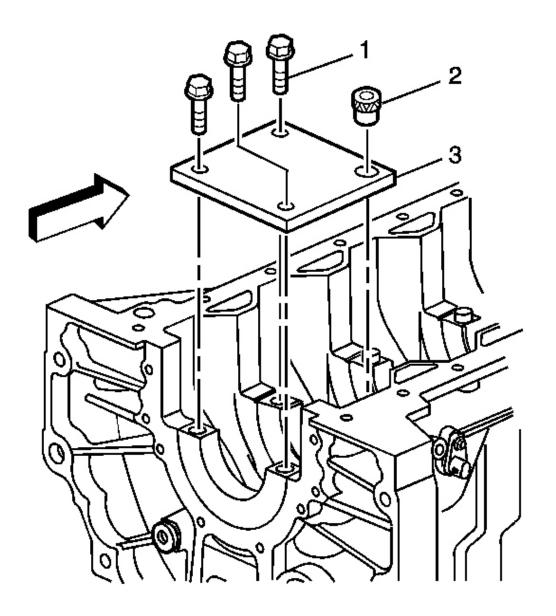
View Of Fixture Plate, Bolts & Bushing Courtesy of GENERAL MOTORS CORP.
